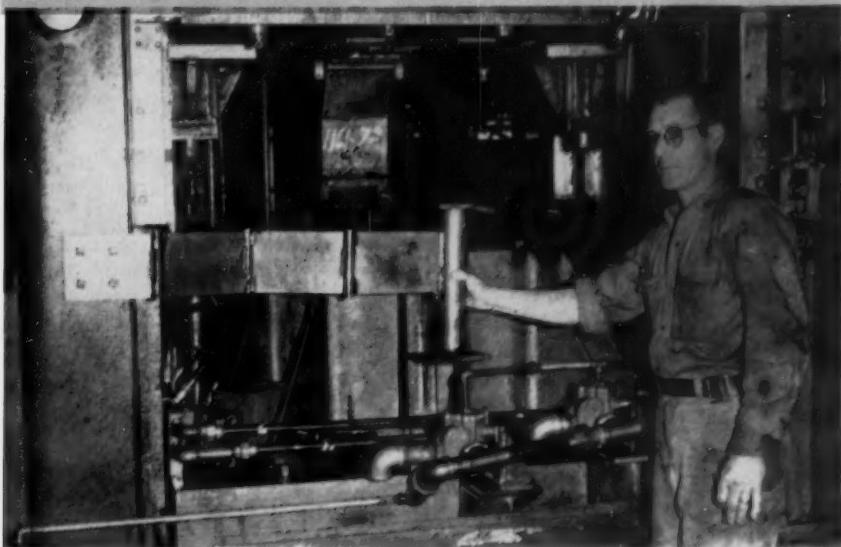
Here the setup man is shown pulling out the hinged mounted die block that is inserted between the die sections when it becomes necessary to wipe and re-oil the dies.
